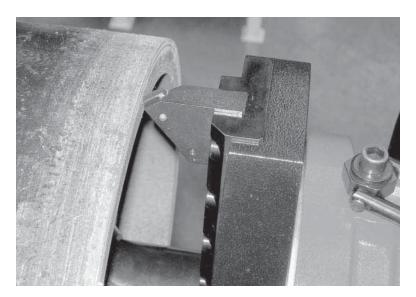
Turn the feed handle to position the tools near the cutting surface. Adjust the tool position if necessary.
